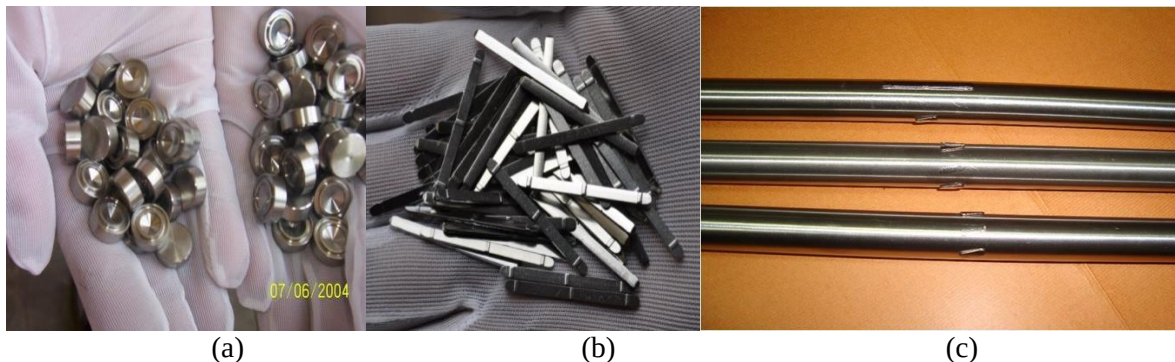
(a) End Caps for 19-element PHWR fuel bundle; (b) Appendages for PHWR fuel bundle; (c) Appendage welded 19-element PHWR fuel tube
